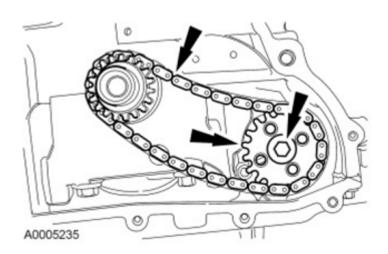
Locating Oil Pump Chain, Sprocket And Bolt Courtesy of FORD MOTOR CO.
